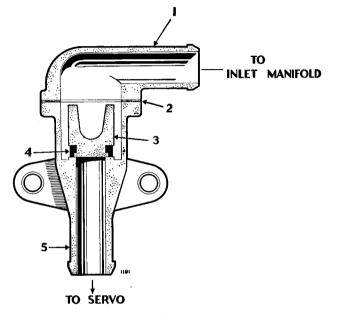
Sectioned view of the 2.4 litre vacuum check valve.
